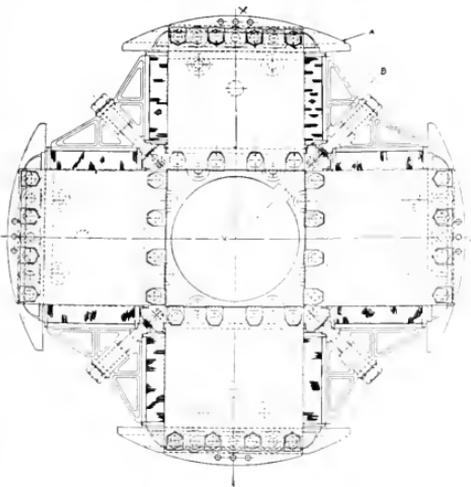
Rotor Assembly of 7000-kv-a., 750-r.p.m., 14,000-volt Alternator
